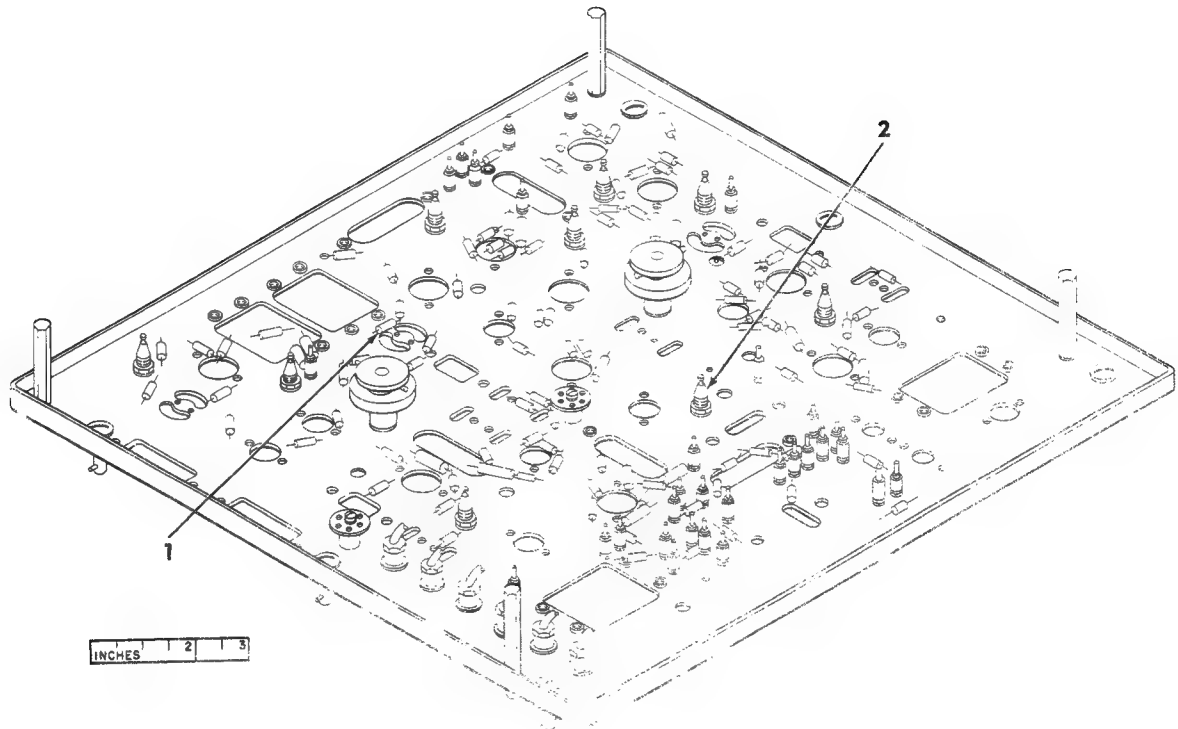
Coder, radar, guided missile (8159347)—partial exploded view
